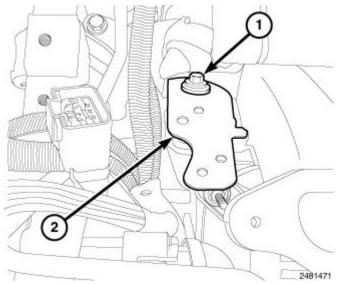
INTAKE MANIFOLD - LOWER Courtesy of CHRYSLER LLC
